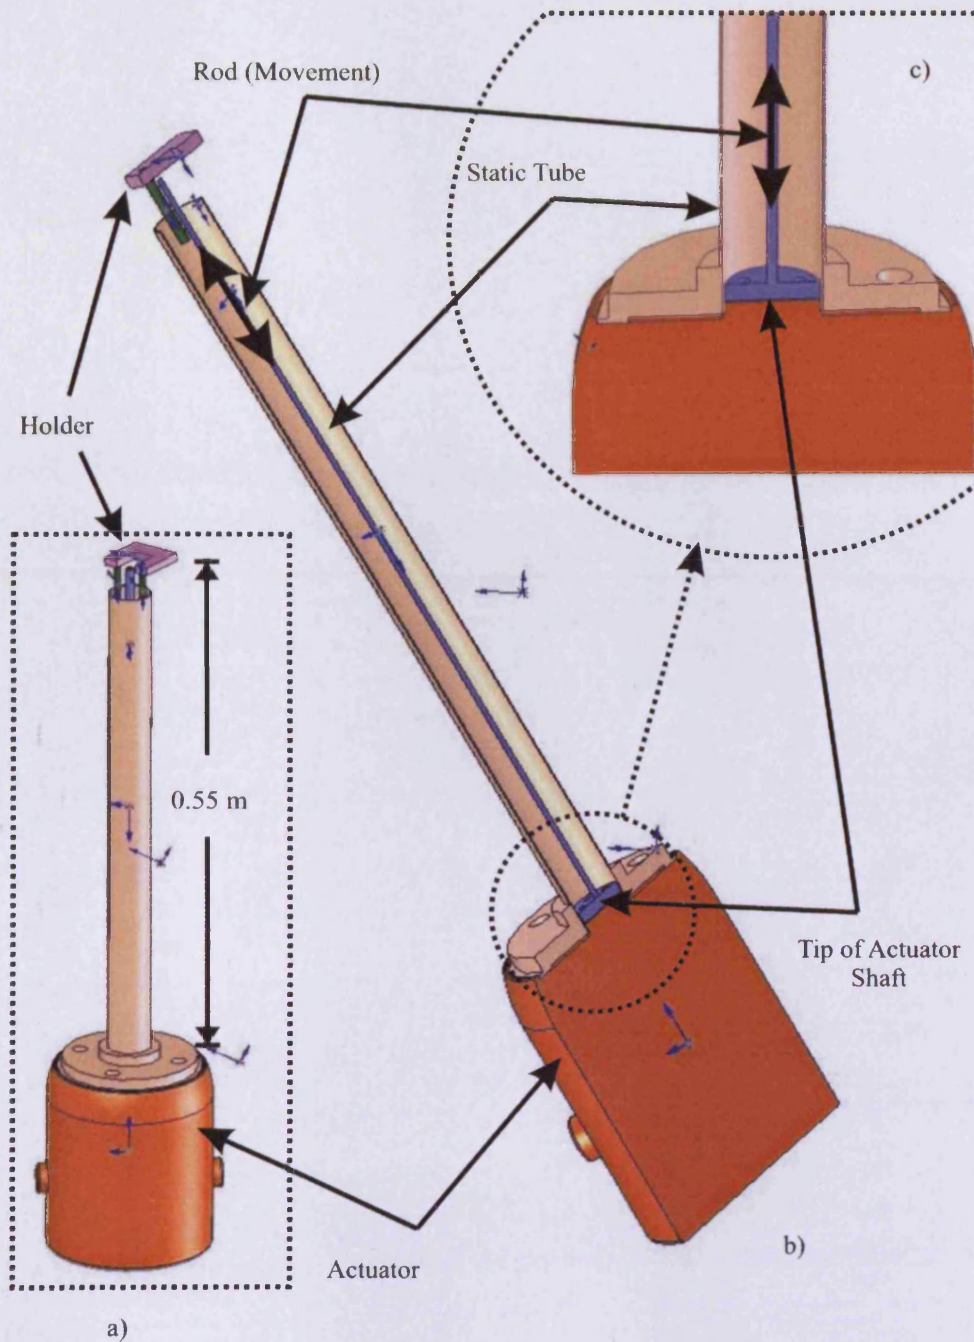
a) Cylindrical extension assembly (with sensor holder) mounted on the actuator, b) the axial cross-section that shows the internal arrangements, c) magnified view of the shaft tip.
